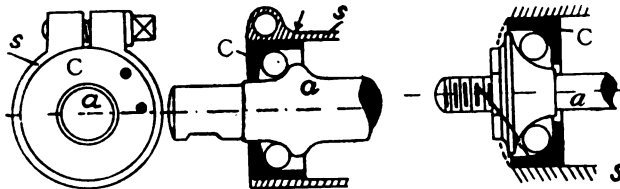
“DISC ADJUSTMENT,” OR “OUTWARD-FACING CONE” TYPE BEARING. FIG. 10.—“INWARD-FACING CONE” TYPE BEARING.
